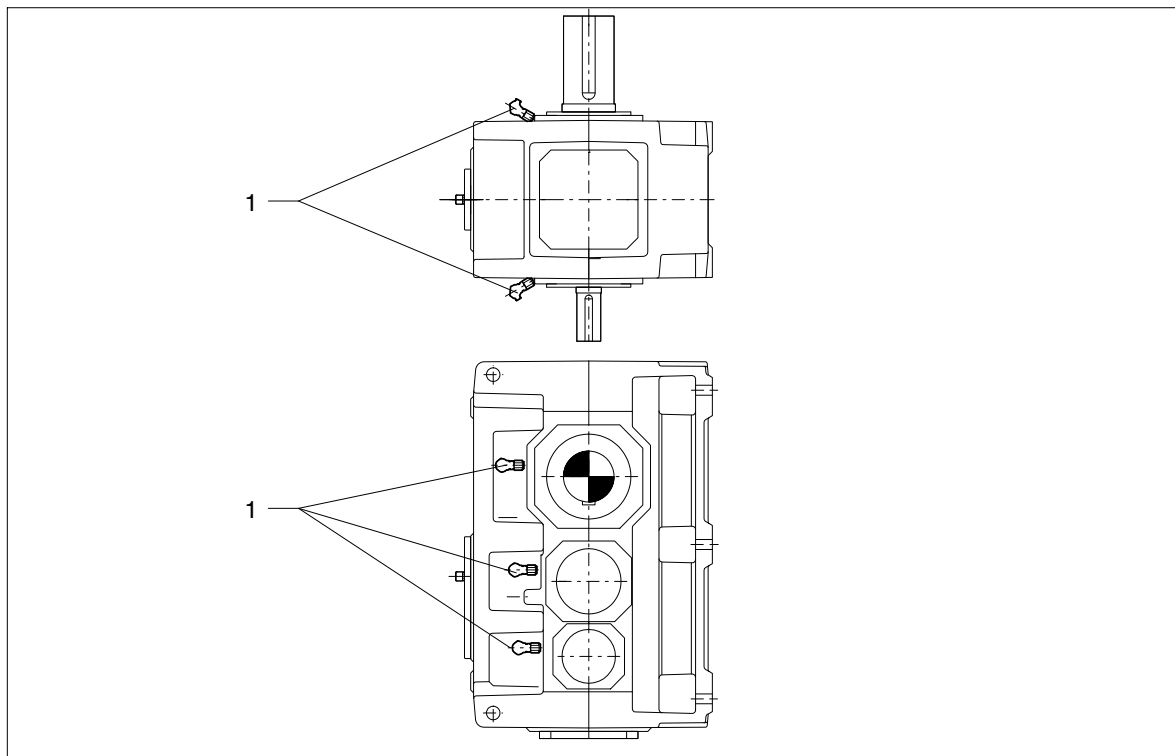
Bearing monitoring by Pt 100 resistance thermometer on gear units of type H2.H
